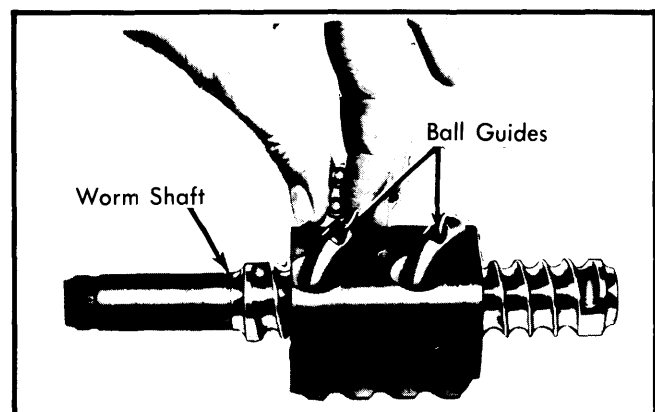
Filling Ball Circuits Through Holes in Ball Guides
